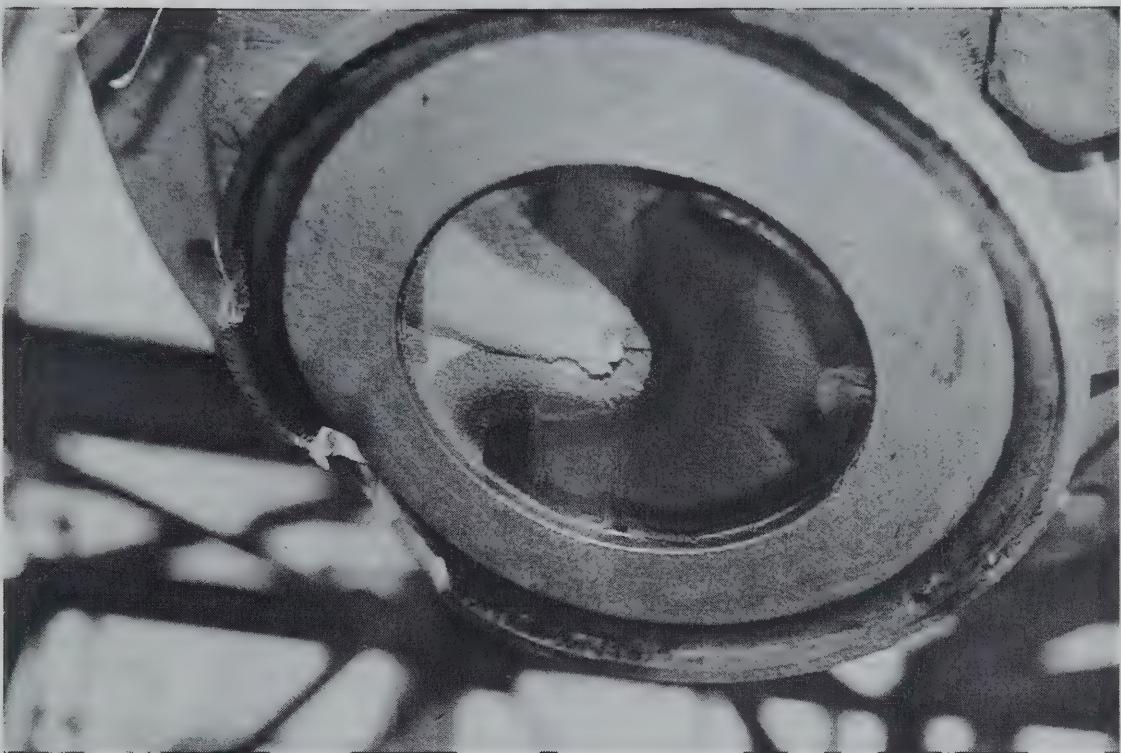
A problem in manufacturing caused a low-cycle fatigue failure.
